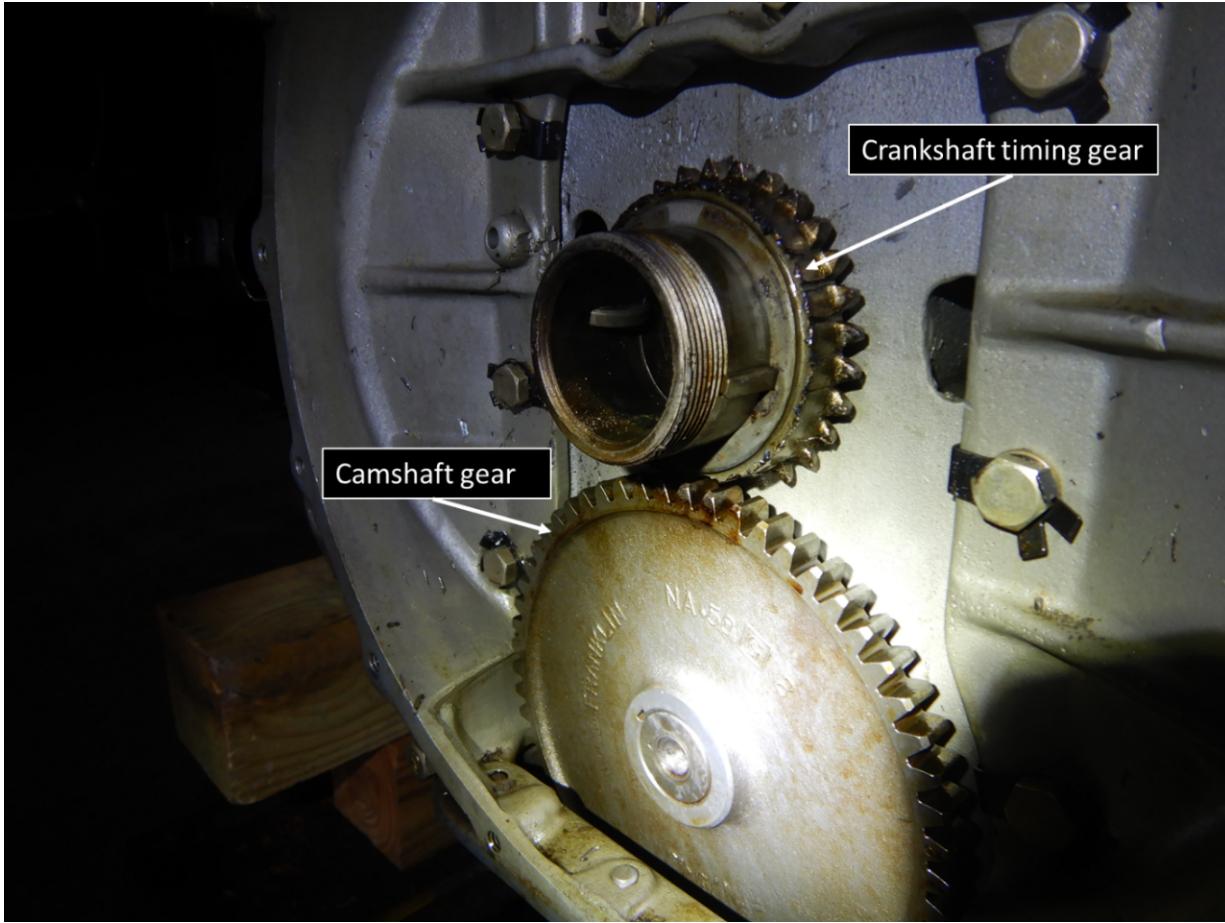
Image of the engine showing the damaged crankshaft timing gear.
